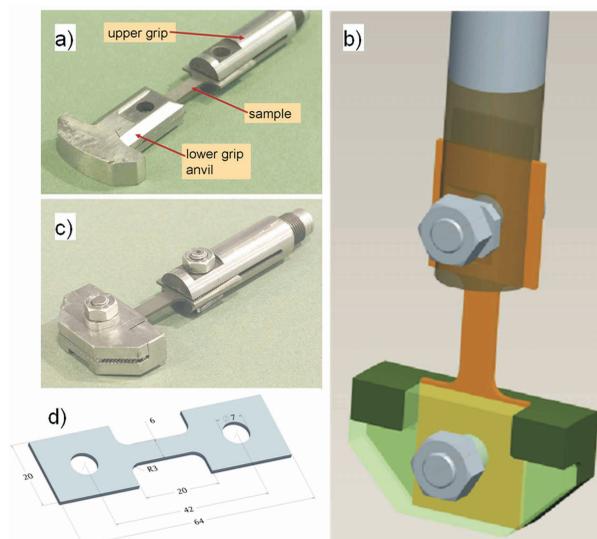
Grips and a sample used during testing: a – upper grip and long lower grip, b and c – short, universal grip, d – sample
